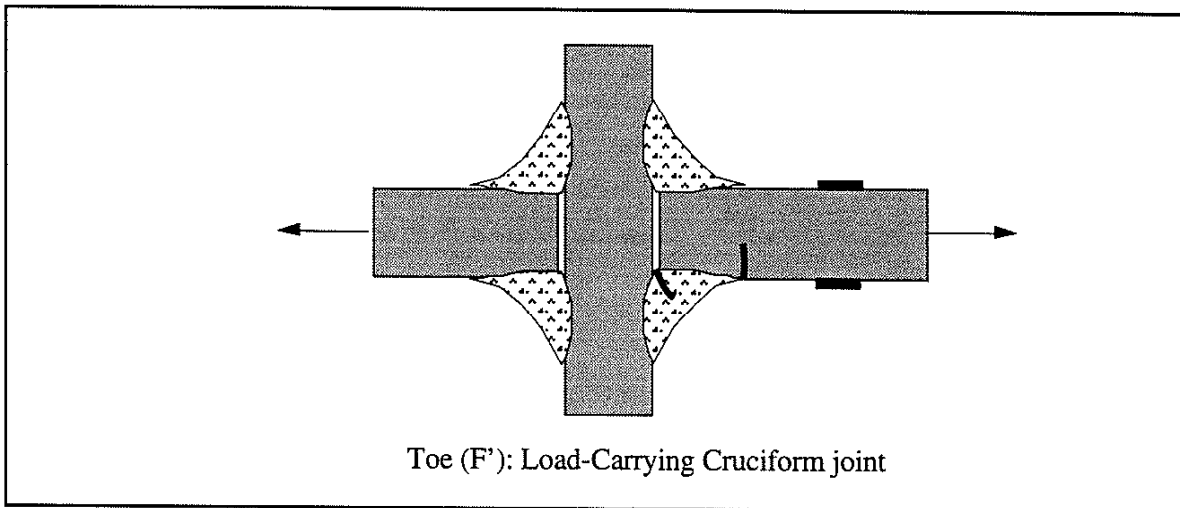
A “Maverick.” The load carrying fillet weld is an important case. Failure may occur at either the weld toe or weld root. Applied axial stresses favor root failures. Applied bending stresses favor toe failures. The size of the IJP controls the notch severity (K_t) of both the root and the toe with the result that this weld can be as “good” as a “good” weld or as “bad” as a termination depending entirely upon the size of the IJP.
